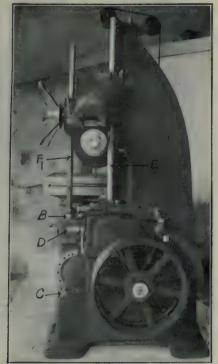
Spindle Drive Universal Horizontal Boring Machine Co., Chicago.
